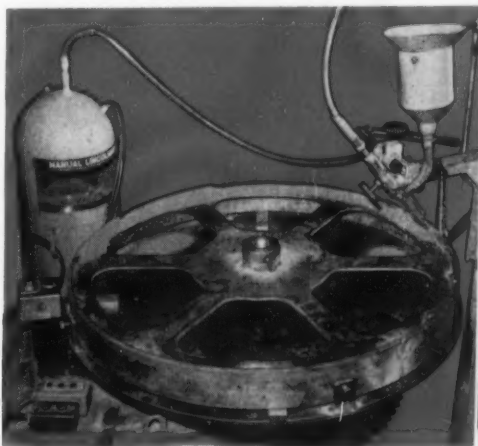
Three spider sections are tack welded and clamped in a work positioner which moves the flange joint under rigidly mounted hidden-arc welding head for automatically welding.
